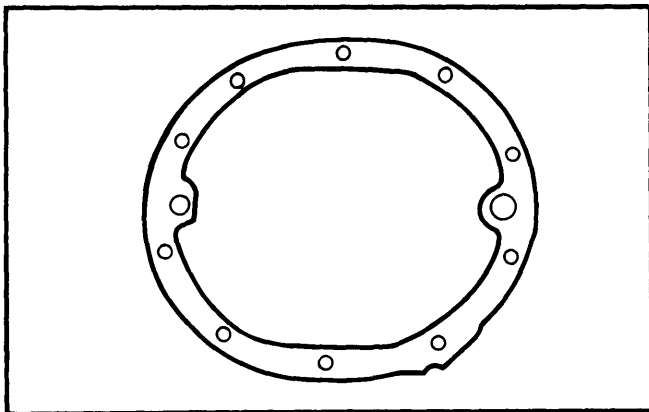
8 1/2" and 8 7/8" Ring Gear Housing Cover Gasket for Axle Identification Purposes
